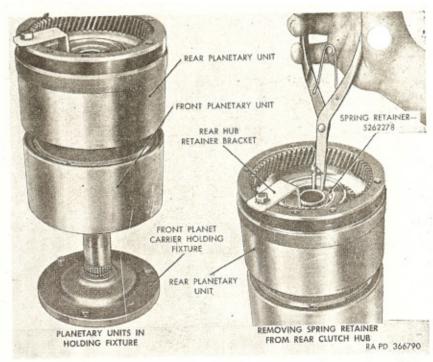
Planetary units and carrier in holding fixture—B7079295.
